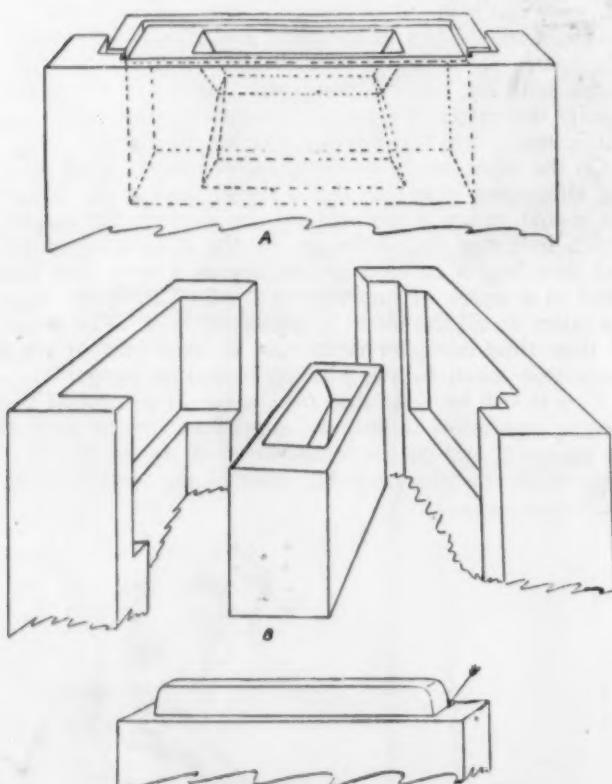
DETAILS OF A "DOZZLE" FOR METAL CASTINGS.
